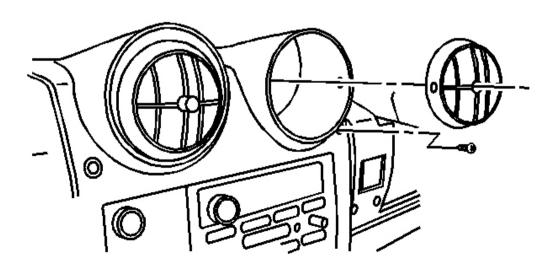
Air Deflector Louver & Instrument Panel (Center) Courtesy of GENERAL MOTORS CORP.
